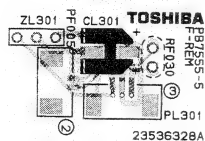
U0015 F-REM PC Board (Top Side)
